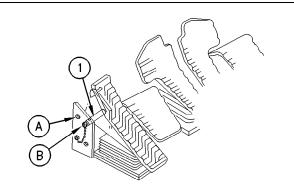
(1) Lock pin (A) UNLOCKED position (B) LOCKED position
